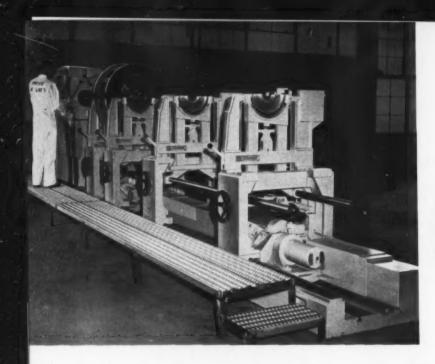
Horizontal balancer, Model UJP, is arranged to check out a JT3 rear-compressor assembly in its "front" pair of supports.
